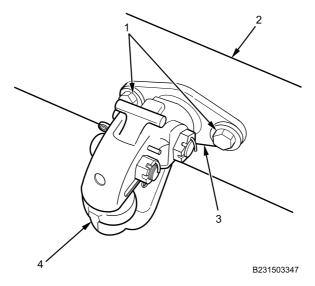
Towing Pintle Hook Assembly on Rear Frame Crossmember.
